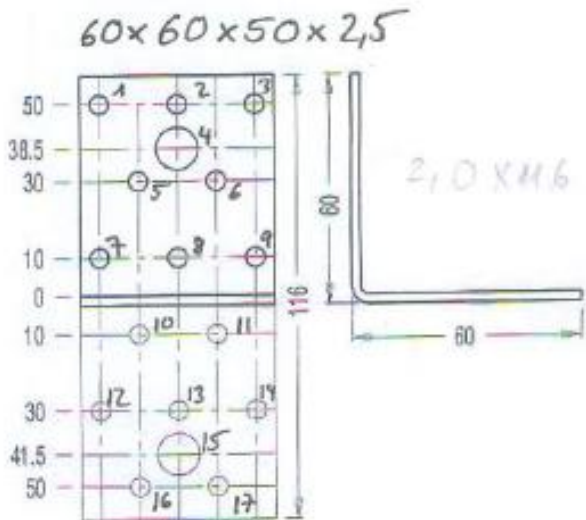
Dimensions of angle bracket 60x60x50x2,5
